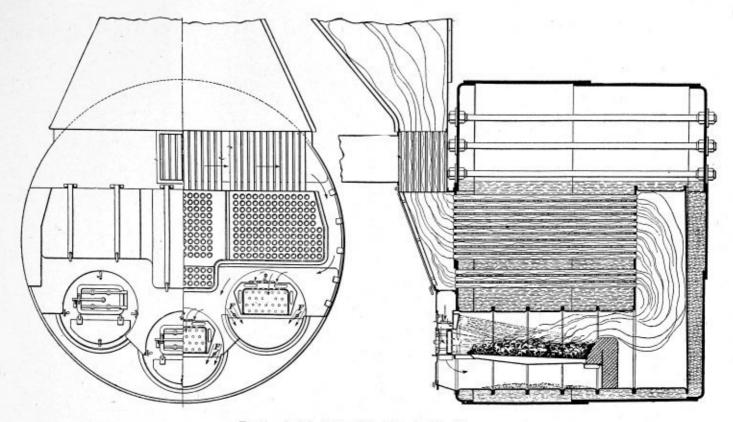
Scotch Boiler with Flanged Ring Furnaces
